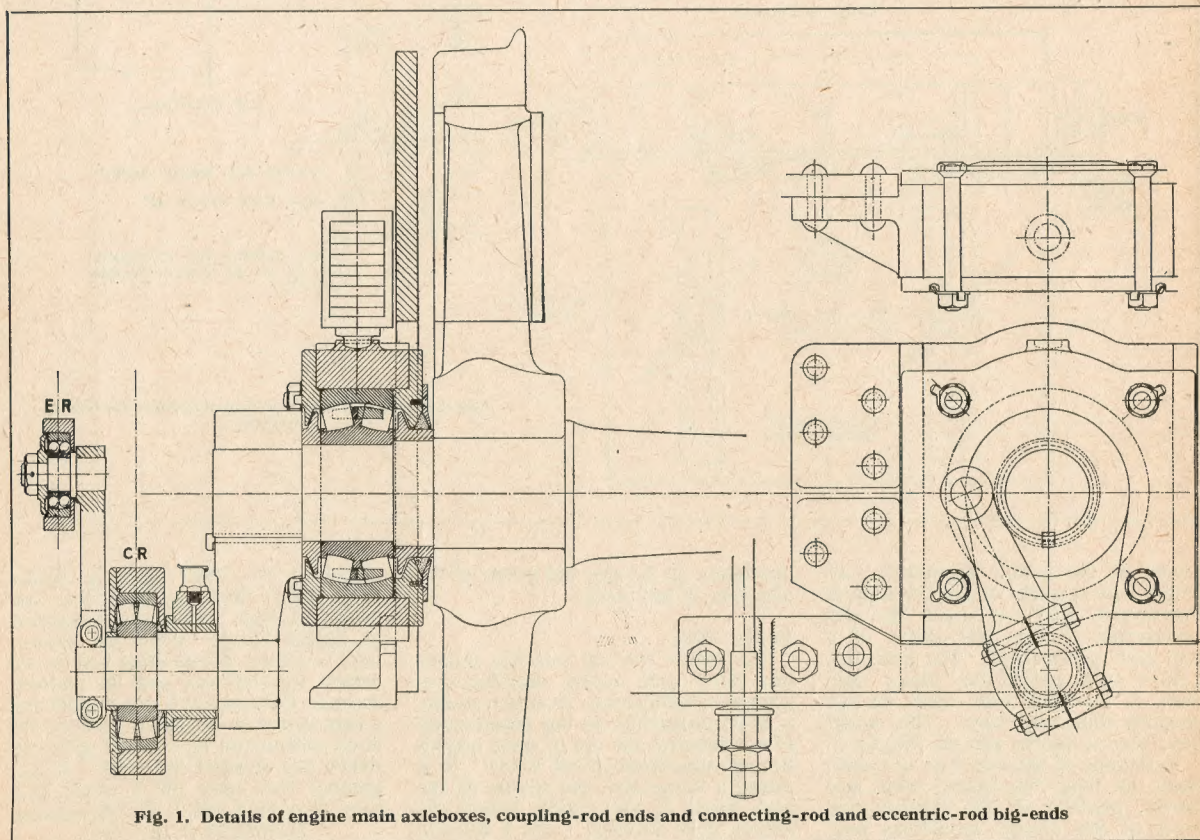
Details of engine main axleboxes, coupling-rod ends and connecting-rod and eccentric-rod big-ends
